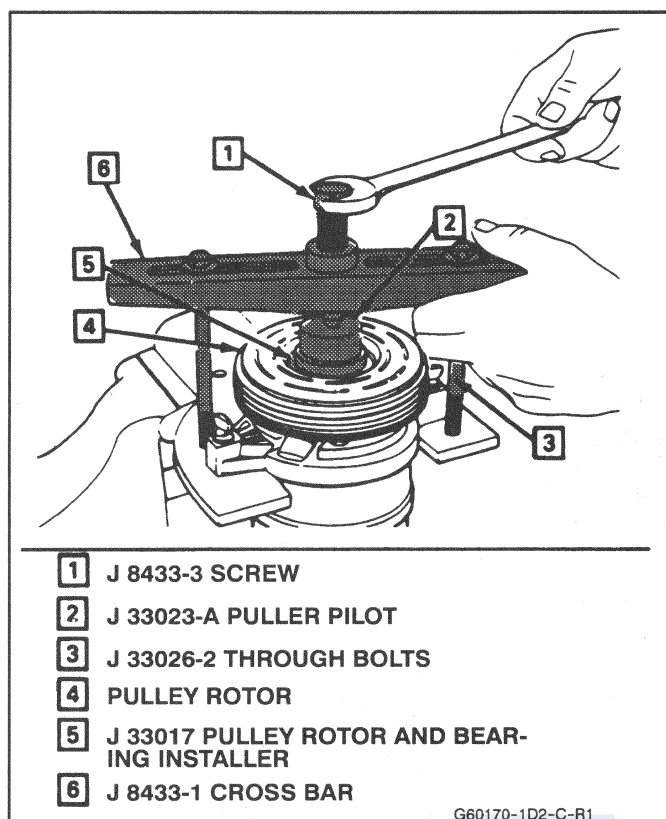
Installing Pulley Rotor and Bearing Assembly
